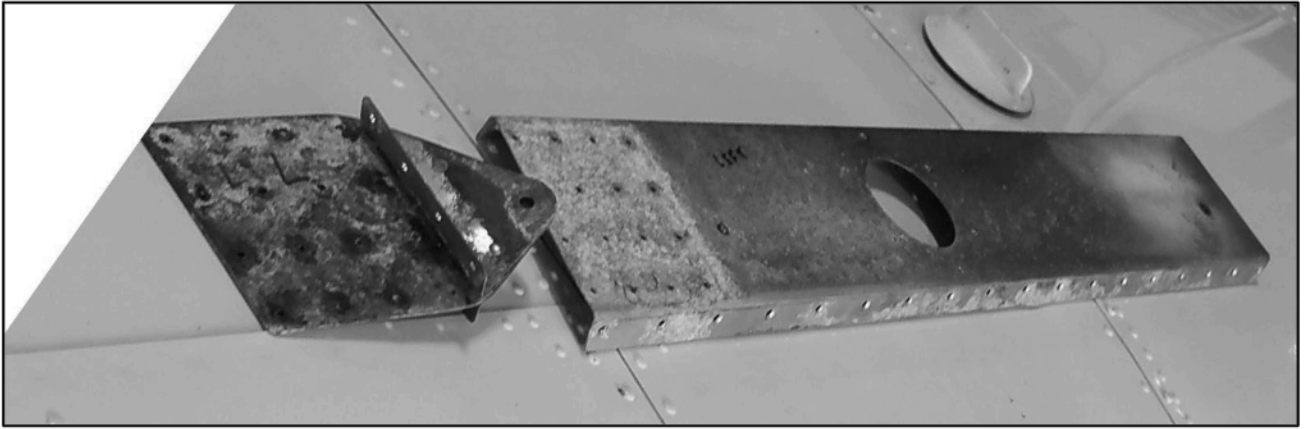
PA-28 Corroded Forward Attach Fitting and Spar Section (removed)
